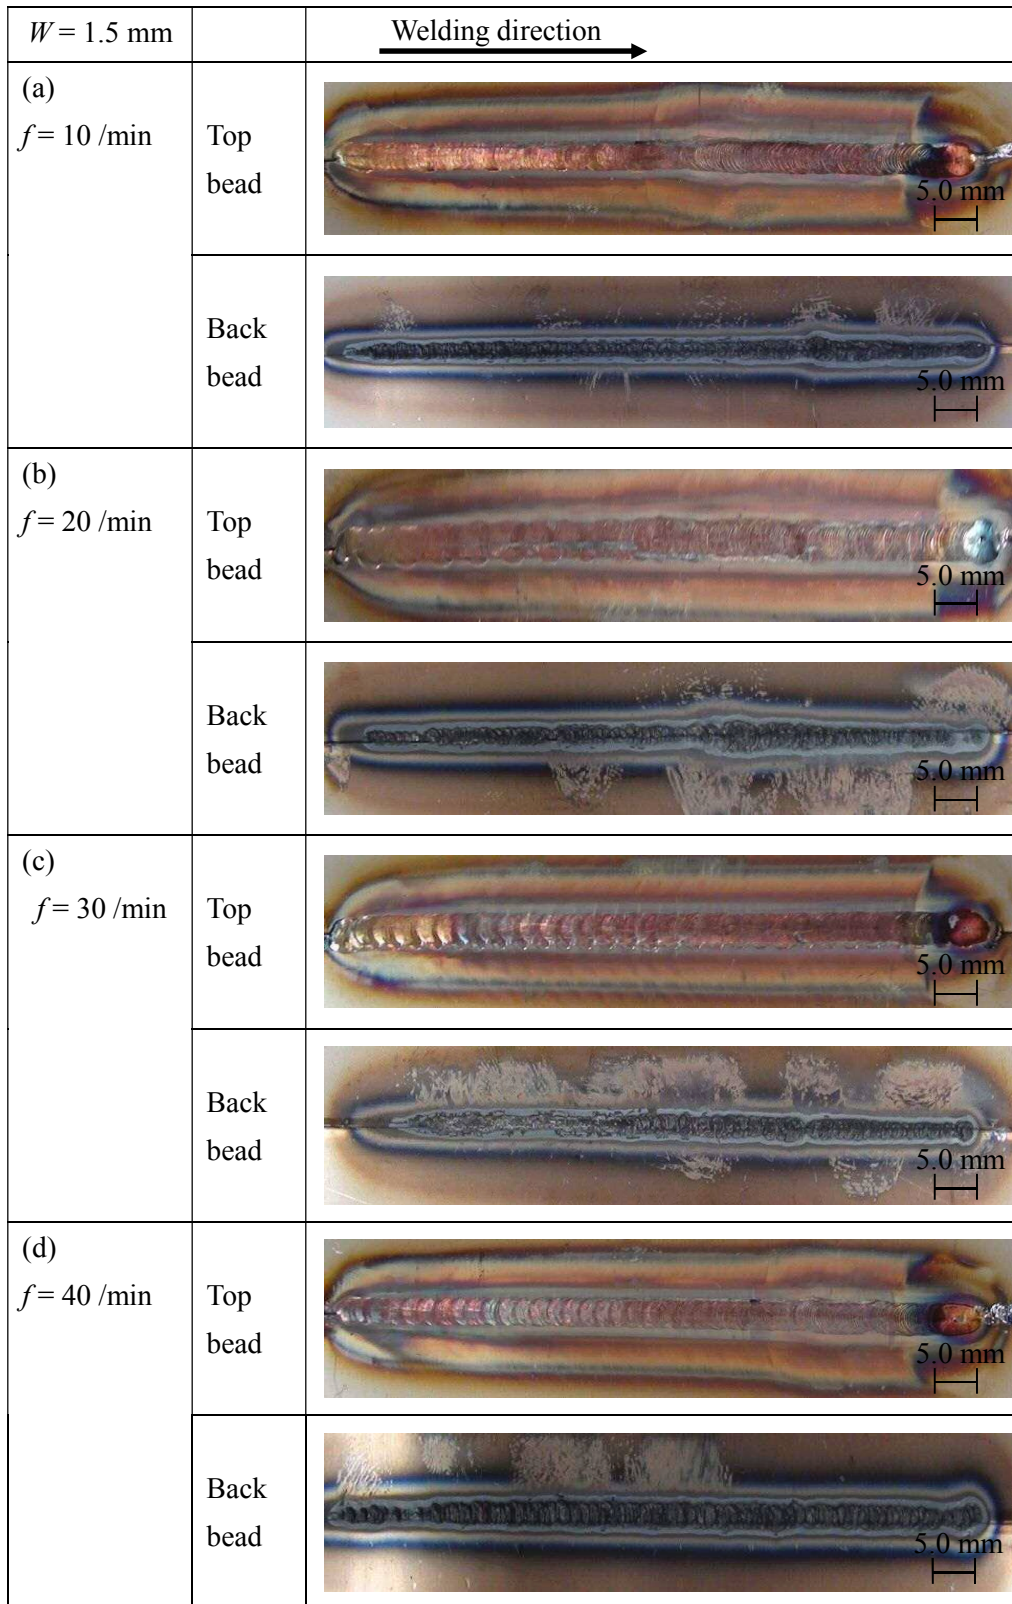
Appearance of hybrid welding beads using laser weaving ($W = 1.5 \text{ mm}$)
